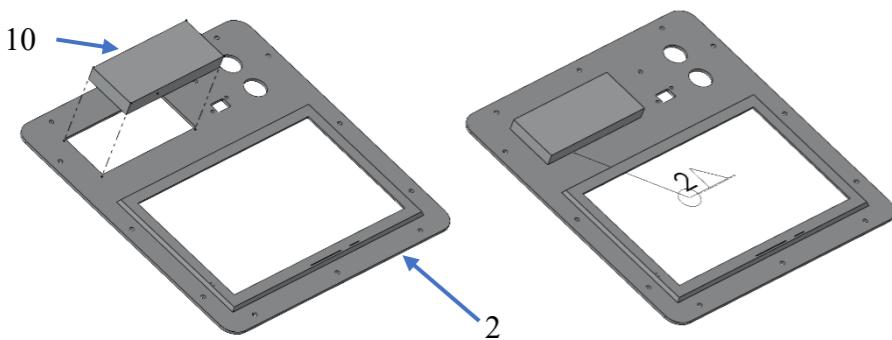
Welding assembly (Left), Welded Assembly (Right)
